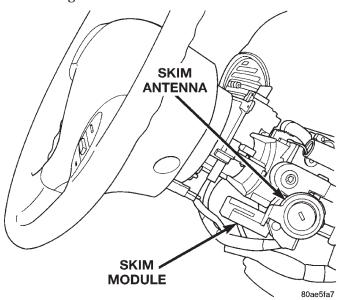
Sentry Key Immobilizer Module Remove/ Install
